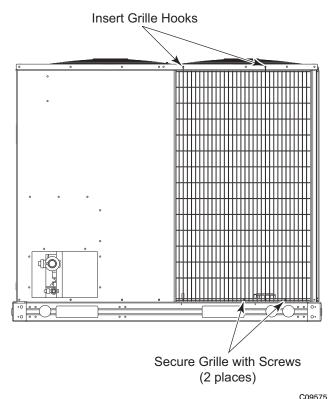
38AU with Outside Coil Grille - Right Side View
